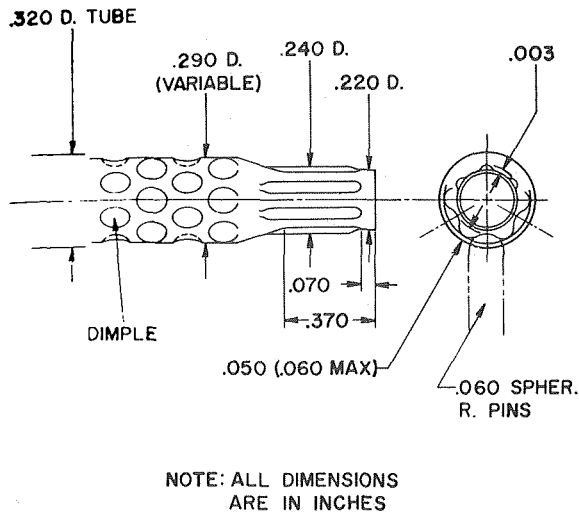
Detail of the tube used in the new shell and tube type oil cooler design
